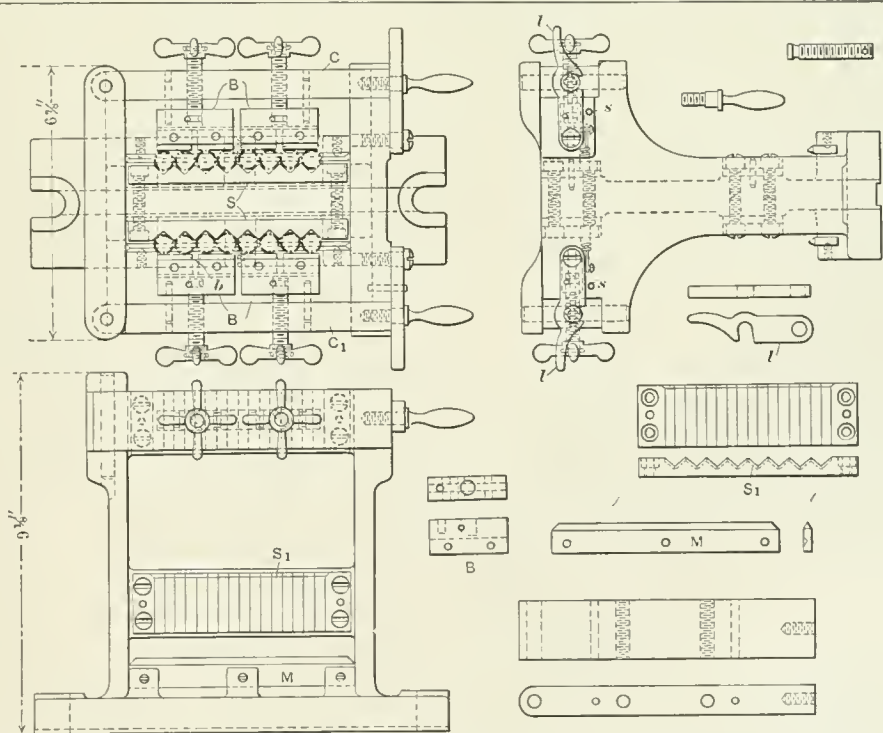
Fixture for Milling Slots in Sixteen Sliding-gear Yoke-shafts
